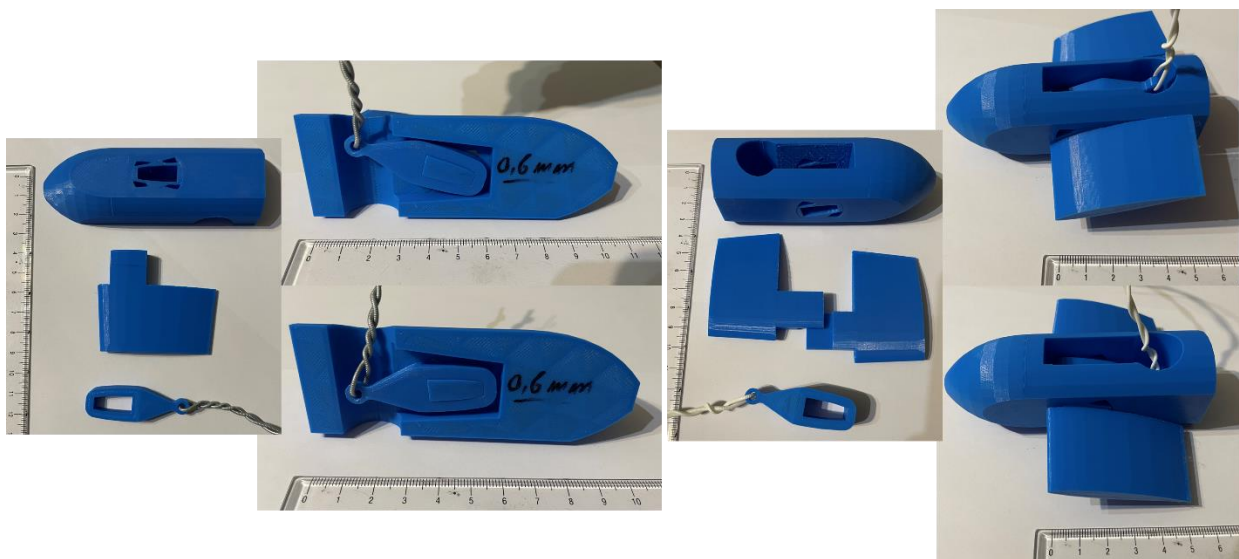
Prototype movement mechanism pieces printed in PLA, exemplifying the rotation movement of the wing. On the Left is the mechanism cross section and on the right is the complete mechanism
